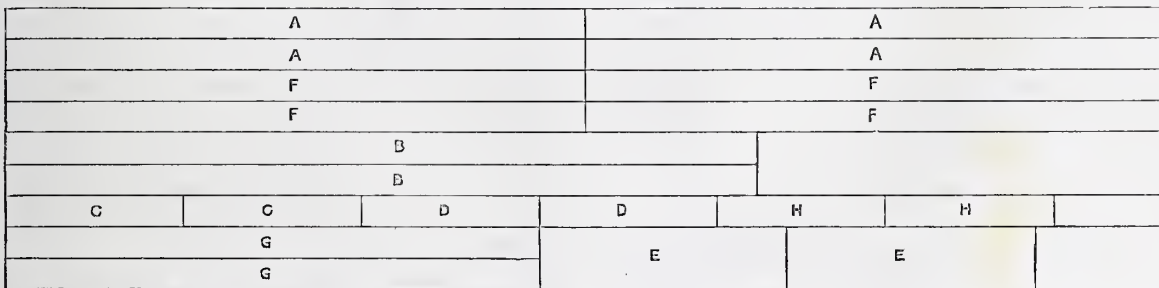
Board Marked for cutting all the Pieces for Frame of Plant Stand. Drawn to one-eighth Scale, or $1\frac{1}{2}$ in. to 1 ft. Length of Board, 4ft.; Breadth, 10 in.
